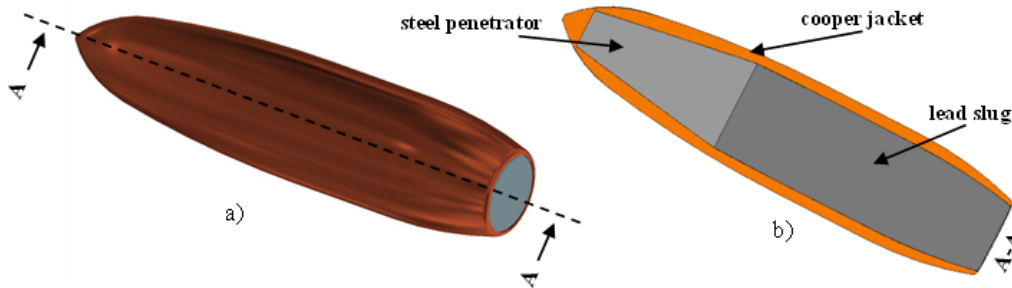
The projectile used in analysis: a) lateral view; b) cross section view
